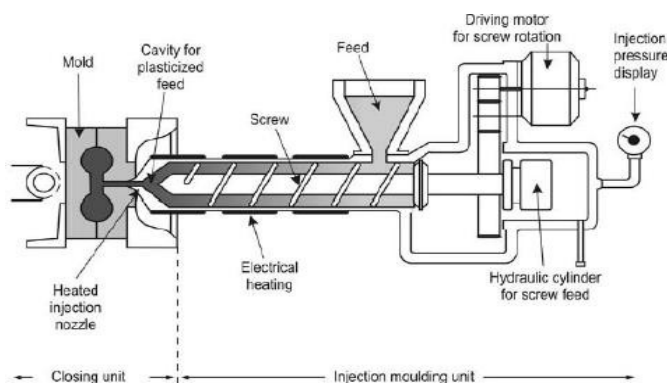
schematic diagram of injection molding machine: screw type (Heinrich and Gomes, 2015)
